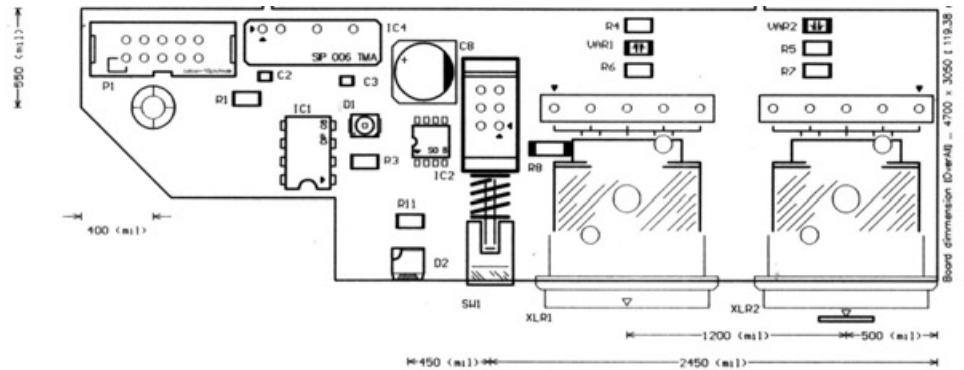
DMX-512 interface module for the ZoomDriver AddOn with dimensions
